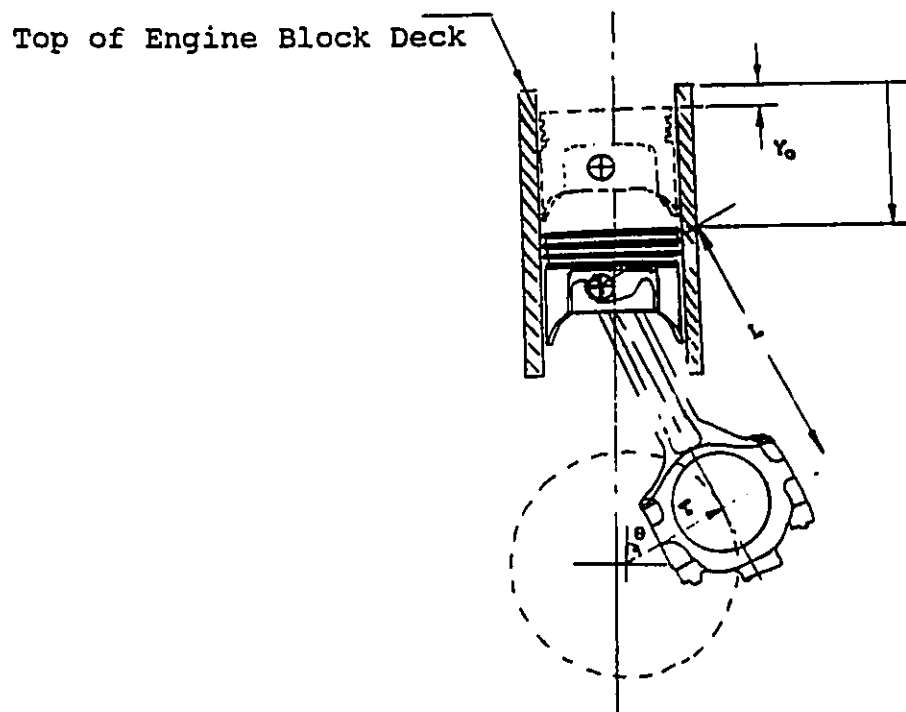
Piston Slider Crank Mechanism with Offsets
